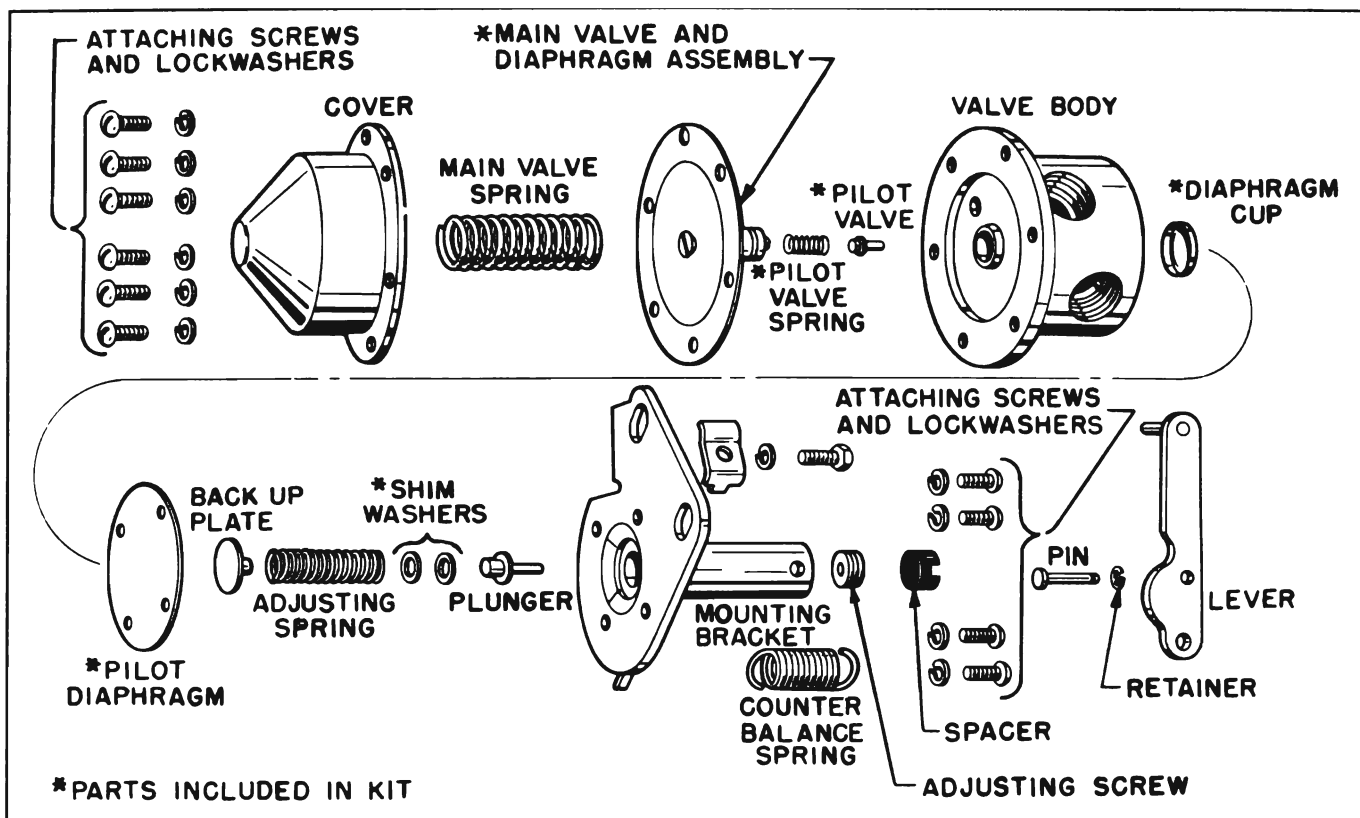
Exploded View of Hot Gas By-Pass Valve
